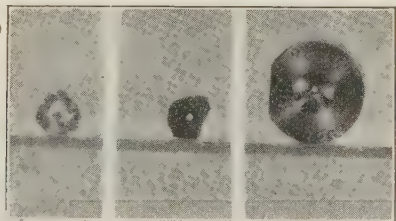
SHOWING DIAMOND BEFORE DRILLING, DRILLED AND LAPPED READY FOR MOUNTING AND DIE READY FOR USE IN FINAL MOUNTING
